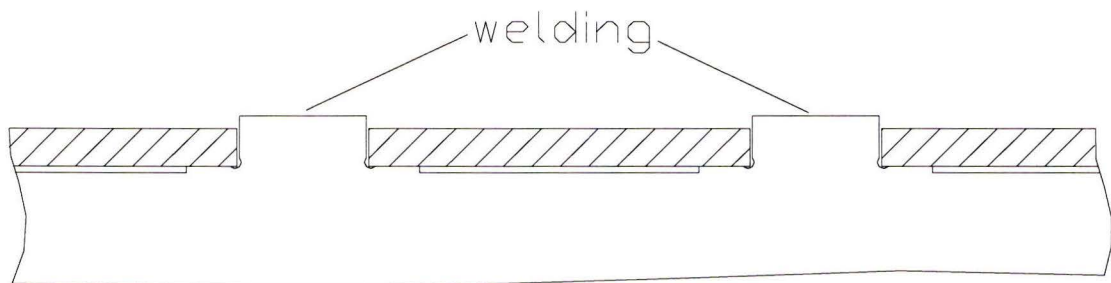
Square toothed plate end with sectioned top sheet
